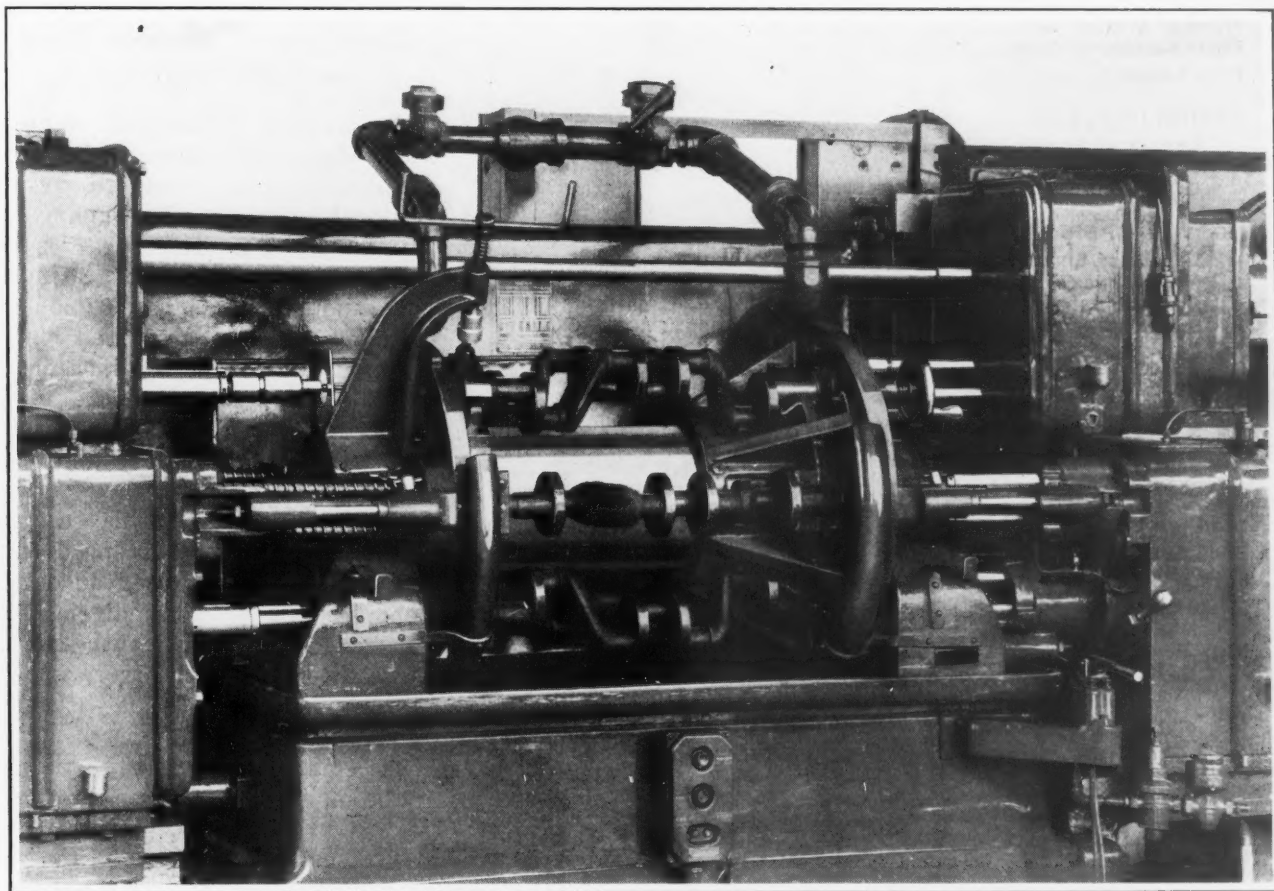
Two-way Hydraulic Driller and Lead-screw Tapper Equipped with Six-position Fixture for Operations on Crankshafts
